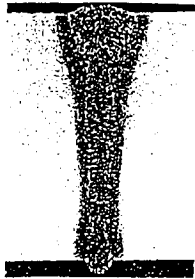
Typical weld shape of a butt joint, [8].
